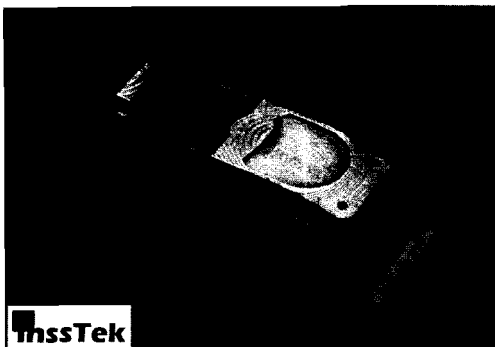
Injection mold insert by DMD process(courtesy of Insstek Inc.).
